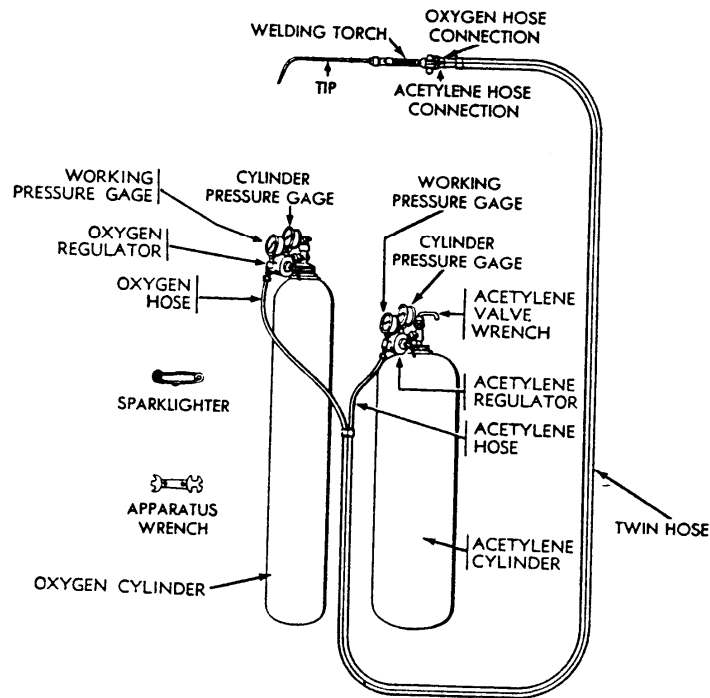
Portable Oxyacetylene Welding and Cutting Equipment
